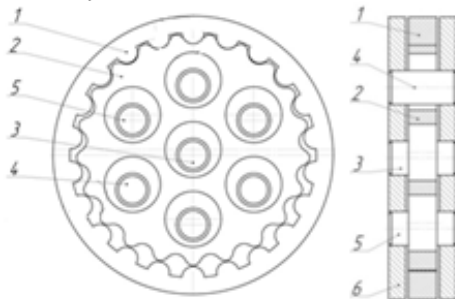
The simplified scheme of a reducer with the modified profile of tooth: 1 – Driven gear; 2 – Driver gear; 3 – Eccentric shaft; 4 – Hub; 5 – Fingers; 6 – Mobile wheel;
